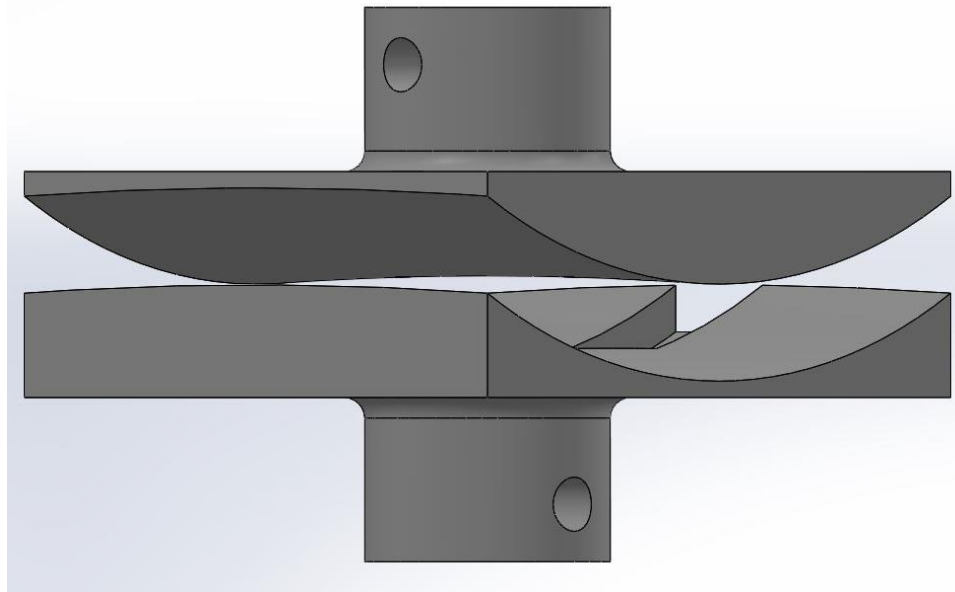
3D CAD model of the designed saddle-like shape biaxial bending fixtures.
